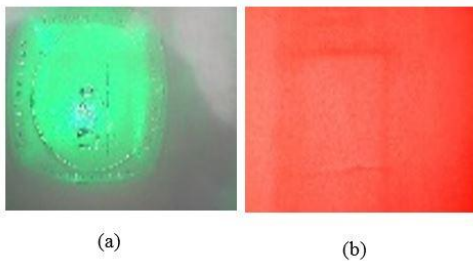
(a) Cracks on bottom portion of the bottle, (b) Cracks on side surface of the bottle
